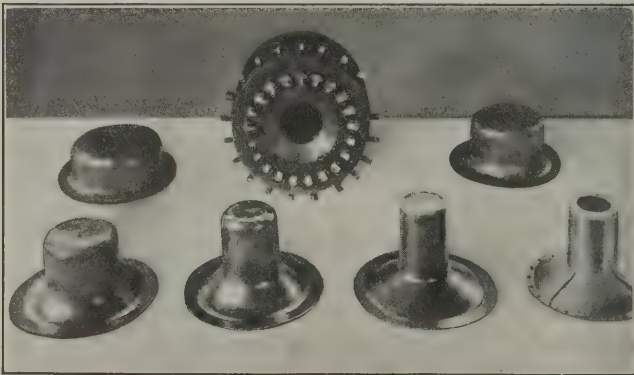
Steps in Drawing a Flanged Cup and the Last Operation Punch
